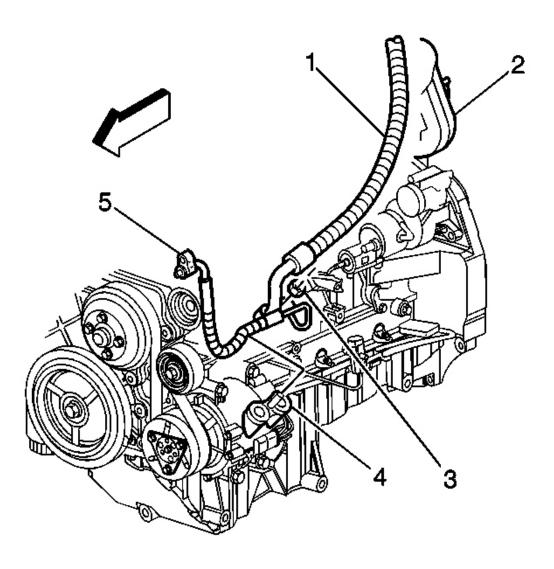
View Of Compressor Hose Assembly Courtesy of GENERAL MOTORS CORP.
